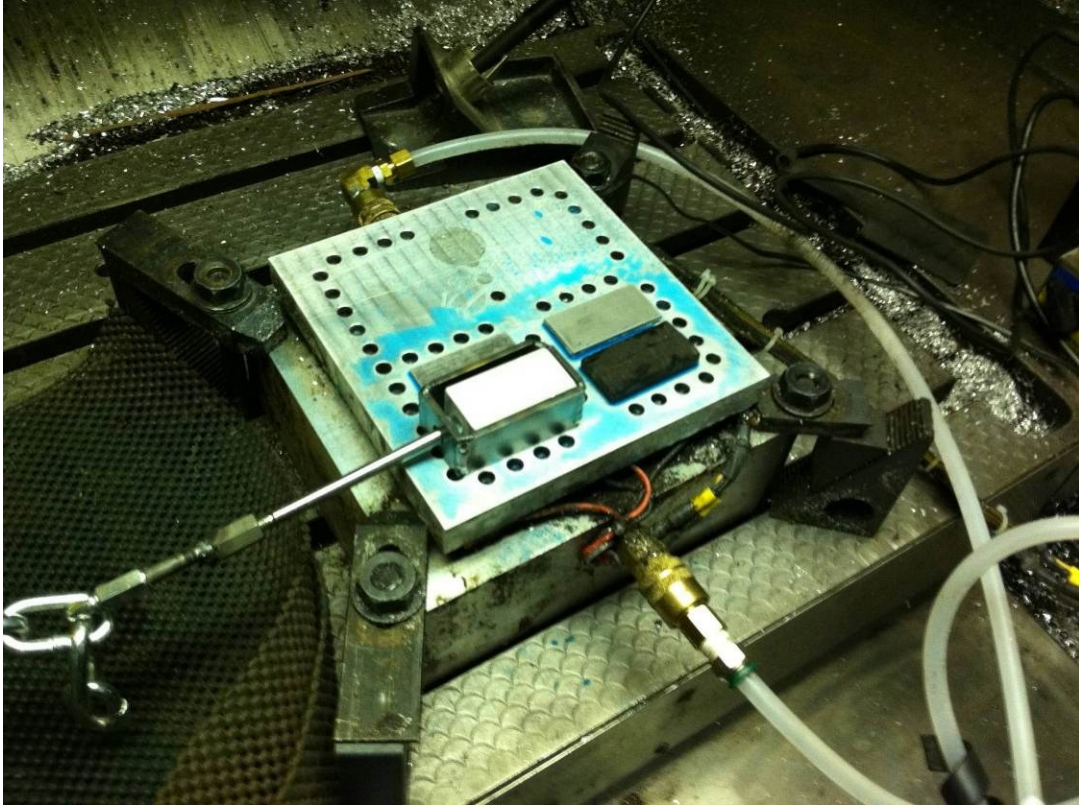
Full plate of workpieces, steel pulling cage shown around aluminum
